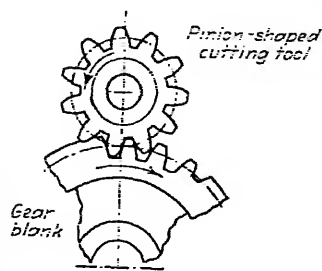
Generating gear with pinion-shaped cutting tool.
